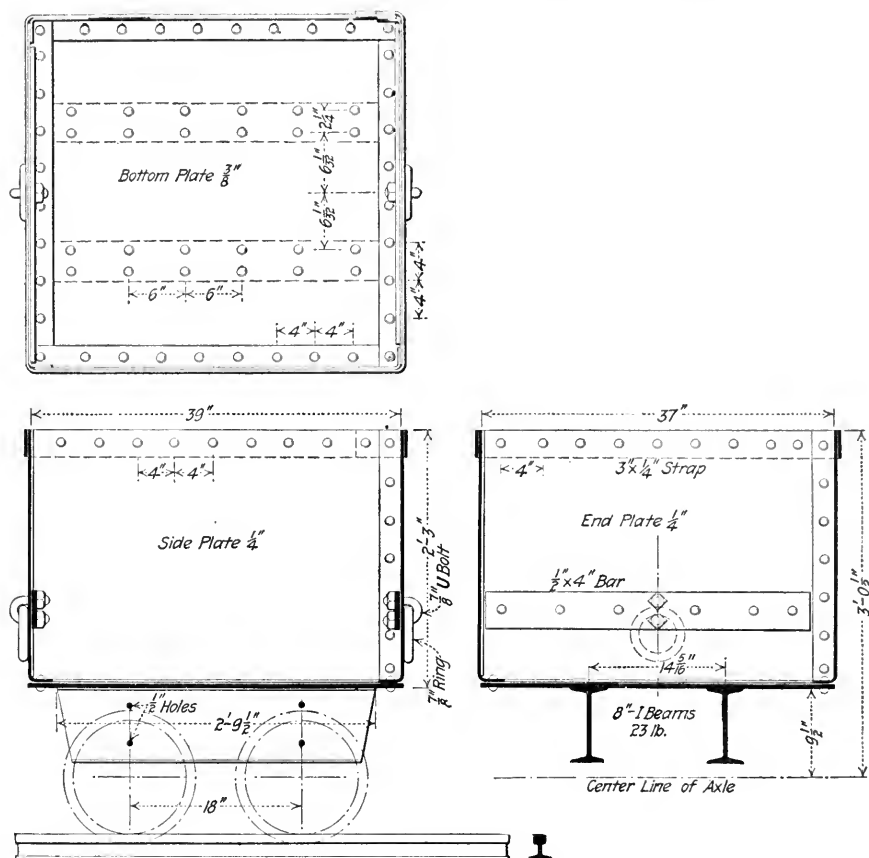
SMALL, RIGID CAR WITH SQUARE-SECTION BODY.
